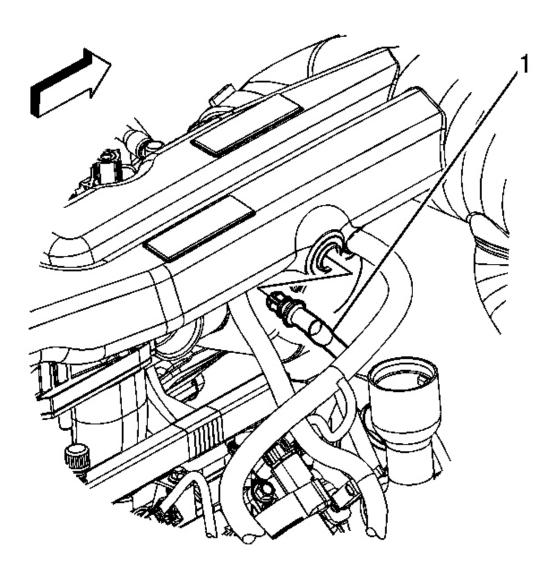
PCV Tube Courtesy of GENERAL MOTORS CORP.
